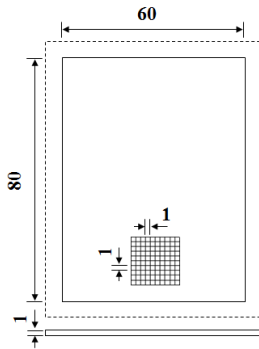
Dimensions of specimen for salt spray test(unit : mm)
